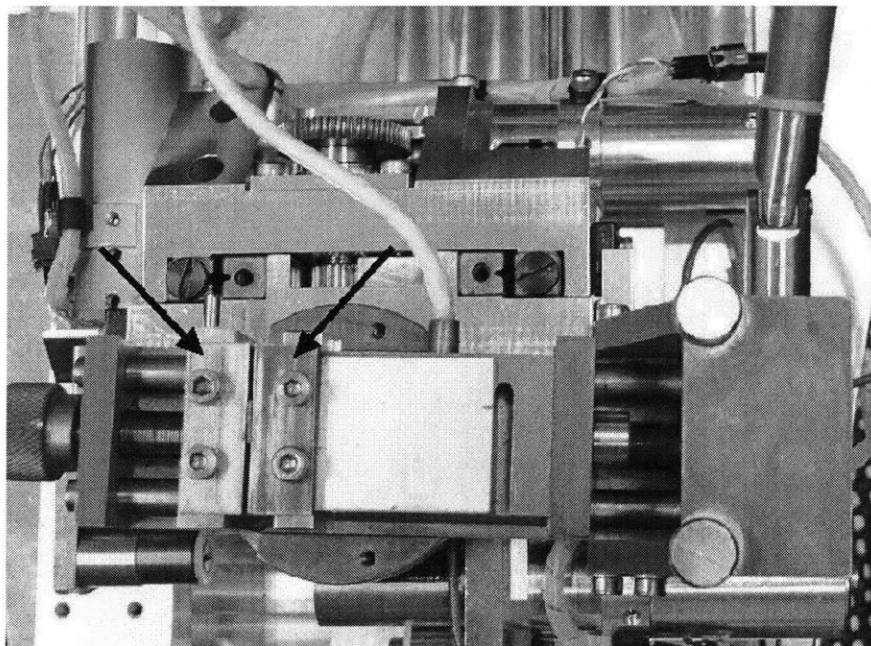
Through-thickness tension fixtures mounted on old deformation stage.
